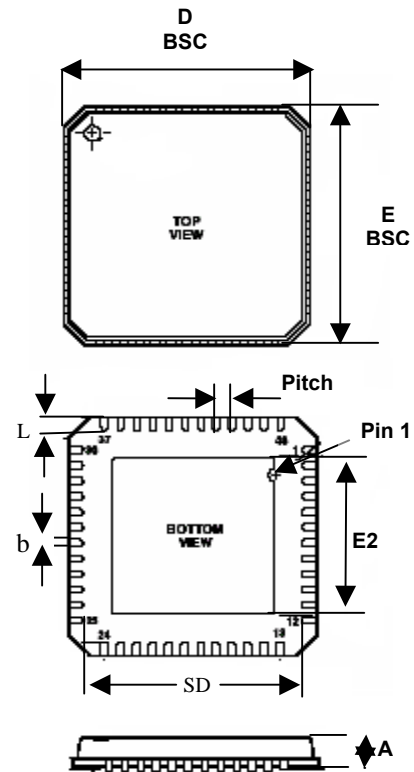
LFCSP Outline Drawing (JEDEC MO-220)
